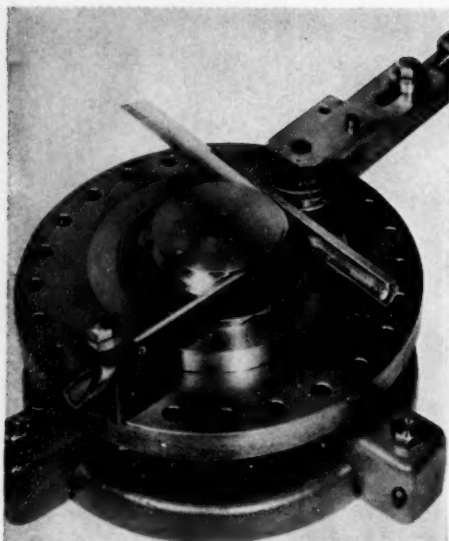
Tubing is formed without flattening cross section and without friction on any surface as semi-circular former is used between forming roll and outer tube surface
